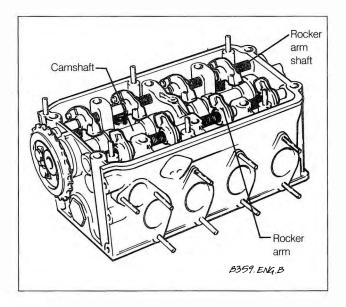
Cylinder head and valve train for models with 4cylinder engine. Cylinder head for models with 6cylinder engine is similar.
